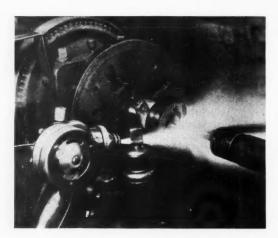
Illustration showing the %inch pulley end of a fractional horsepower motor being metallized with .10 carbon steel.
